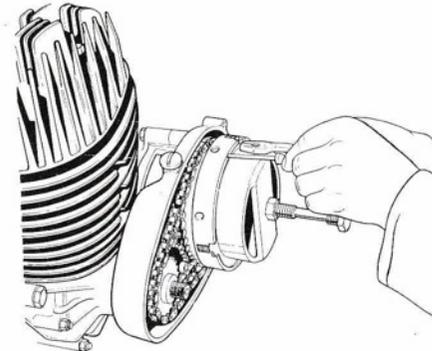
Fitting the clutch large circlip with the diaphragm spring compressed.
